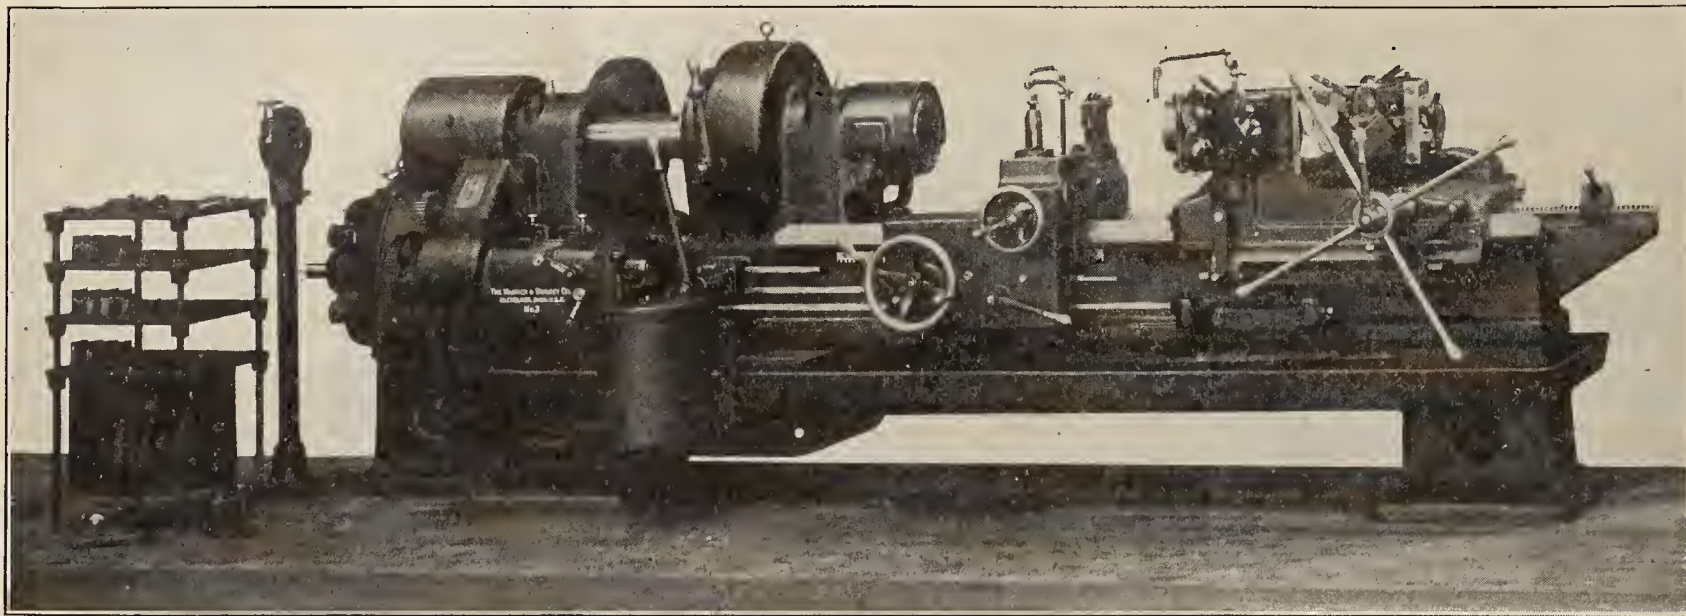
No. 2, HOLLOW HEXAGON TURRET LATHE.
